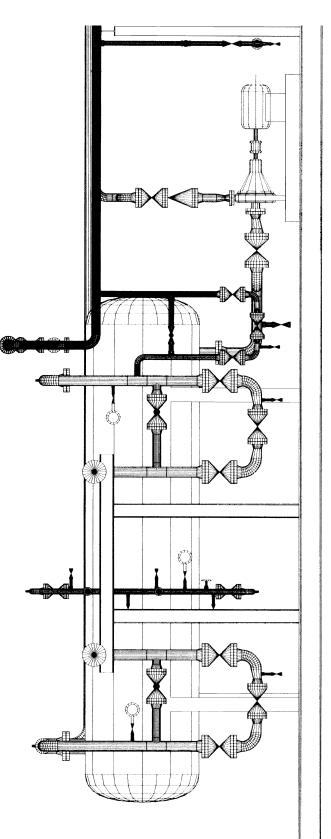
Model of a piping assembly mounted on a skid. (Model courtesy of Gene Eckert, ECAD, Inc.)
